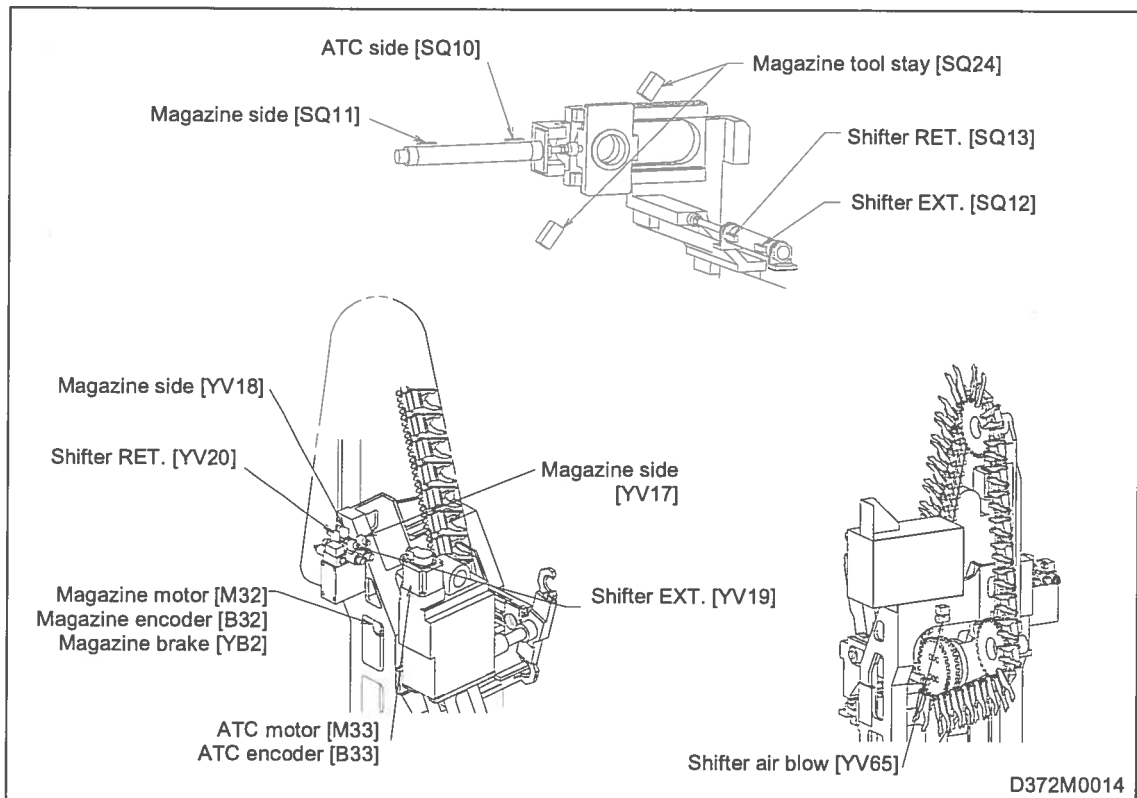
Equipment layout (ATC and magazine) [20/40-tool magazine]
